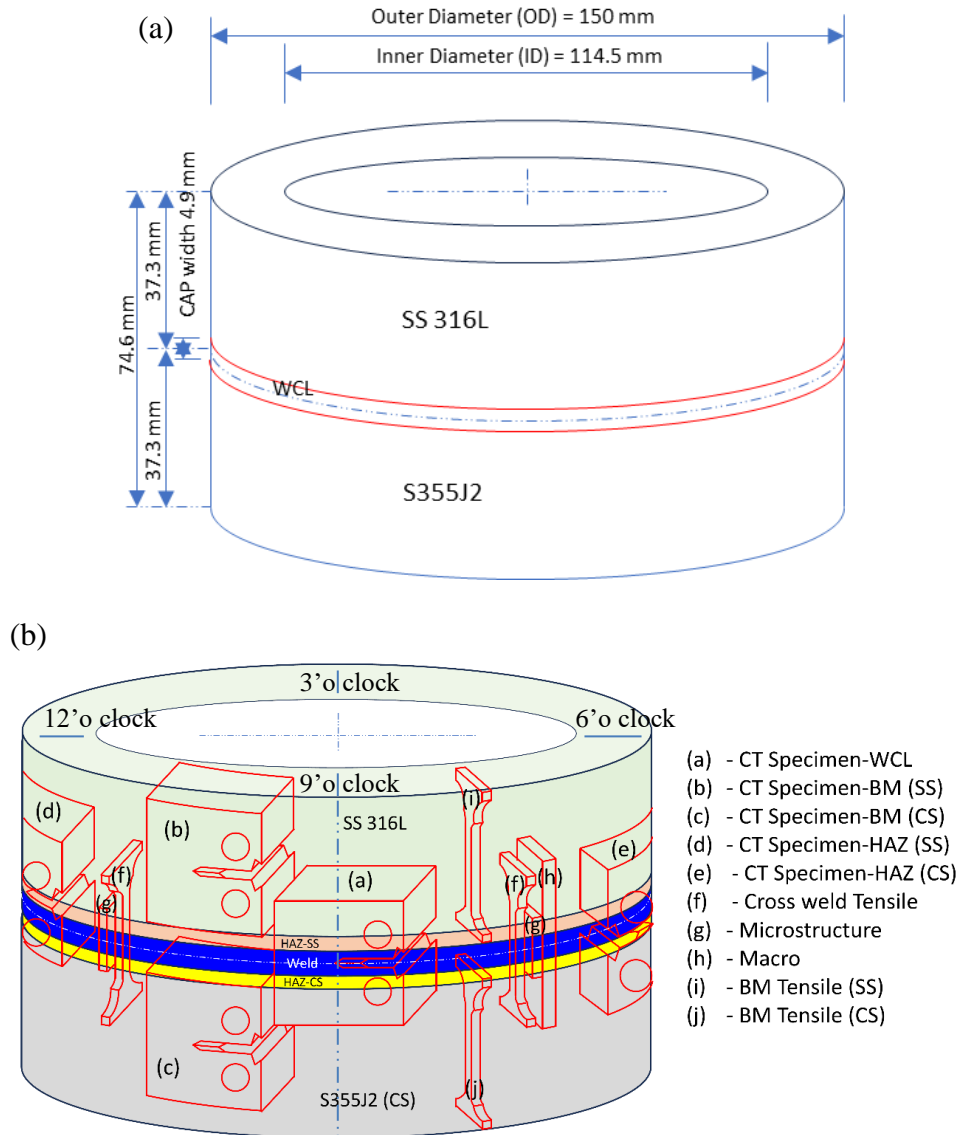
Schematic displays (a) TIG weld joint between S355J2 and SS316L with dimension and (b) locations selected for extracting tensile and CT samples from different key zones of the weldments.
